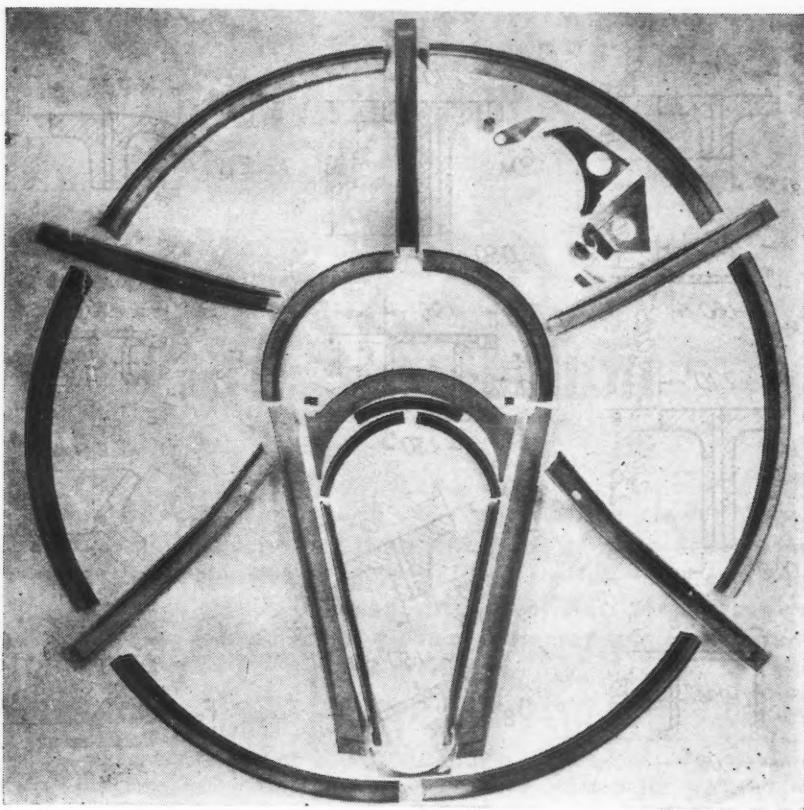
Separate press-formed pieces for steel B-29 bomber nose frame.
